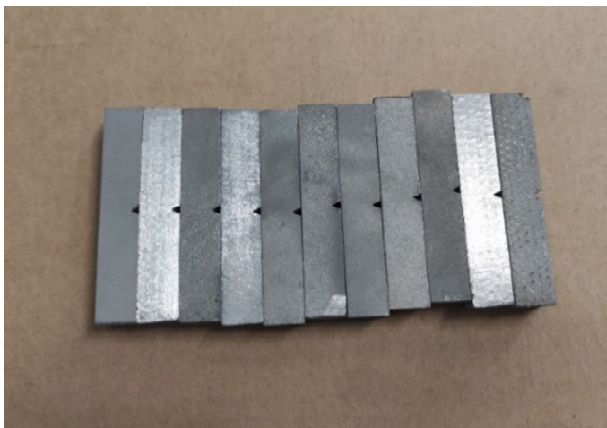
Samples after 3D printing with DMLS technology prepared for impact testing
